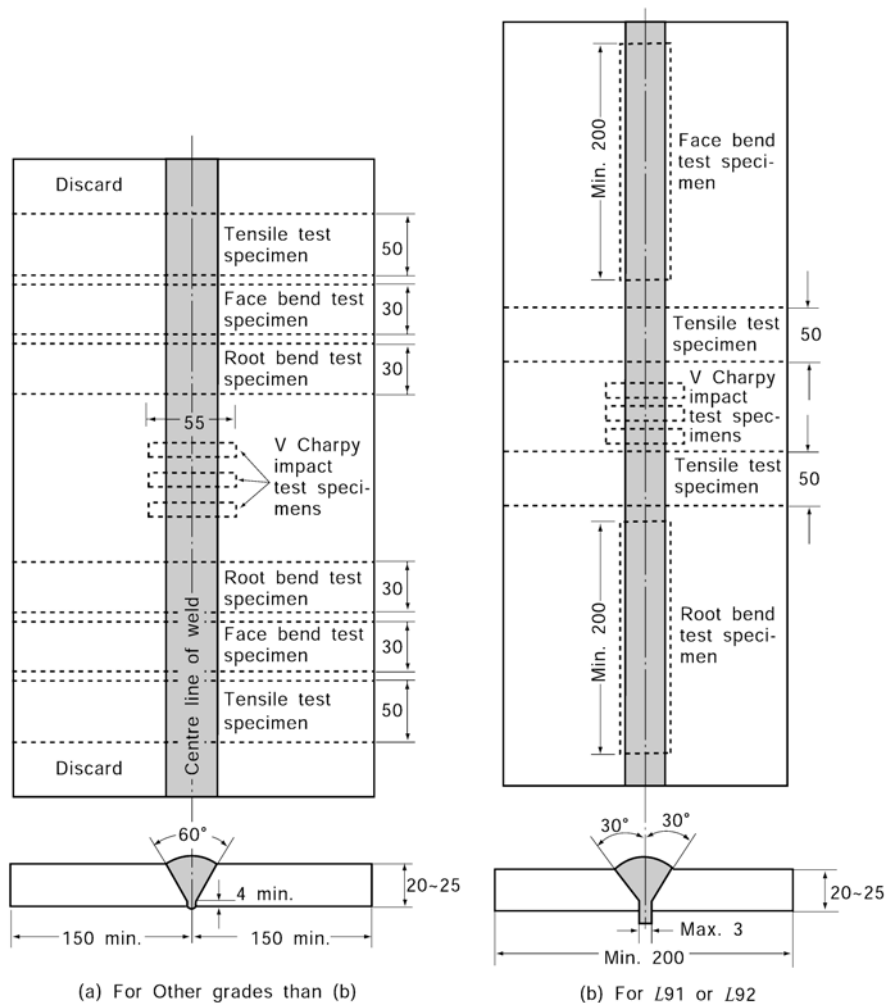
Butt Weld Test Assembly with Multi-run Technique (Automatic welding, Unit : mm)
